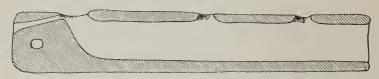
SECTIONAL VIEW OF FIG. 306.
